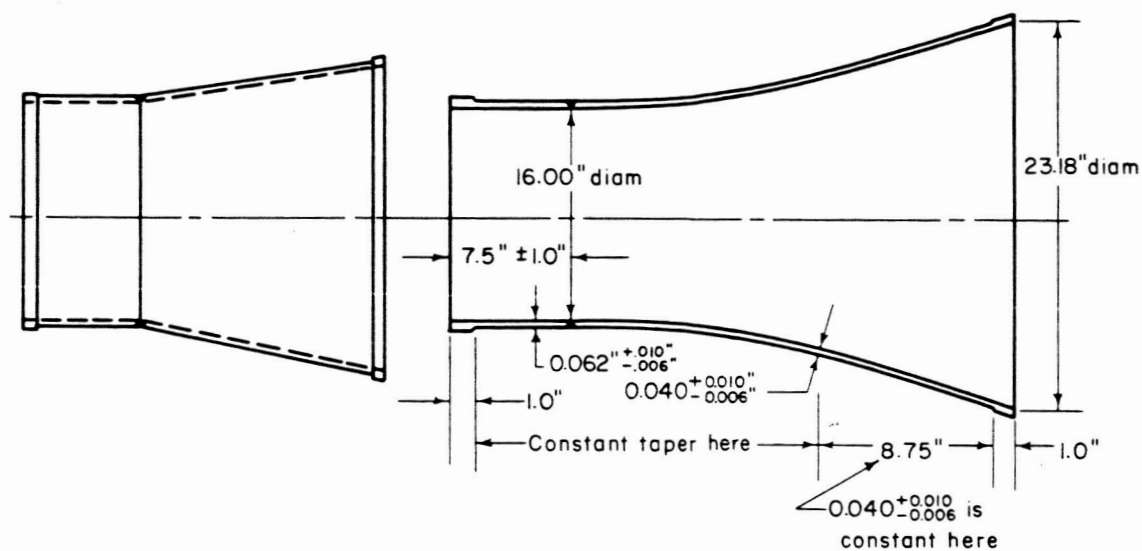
SHEAR-FORMED PART MADE FROM TWO SHEAR-FORMED PIECES AND WELDED TOGETHER (REF. 59)
